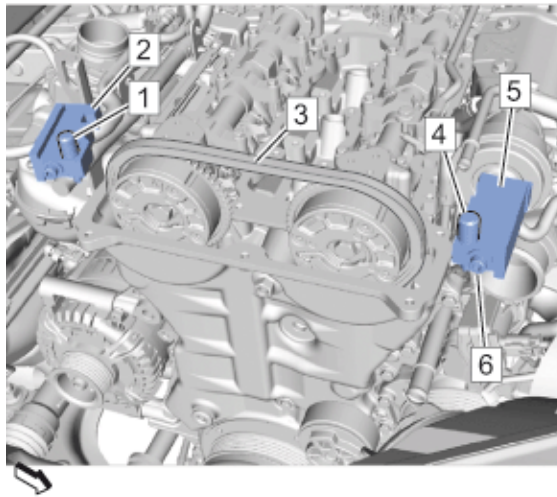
Camshaft Timing Chain, Retainers, Thumb Wheels And Bolts
